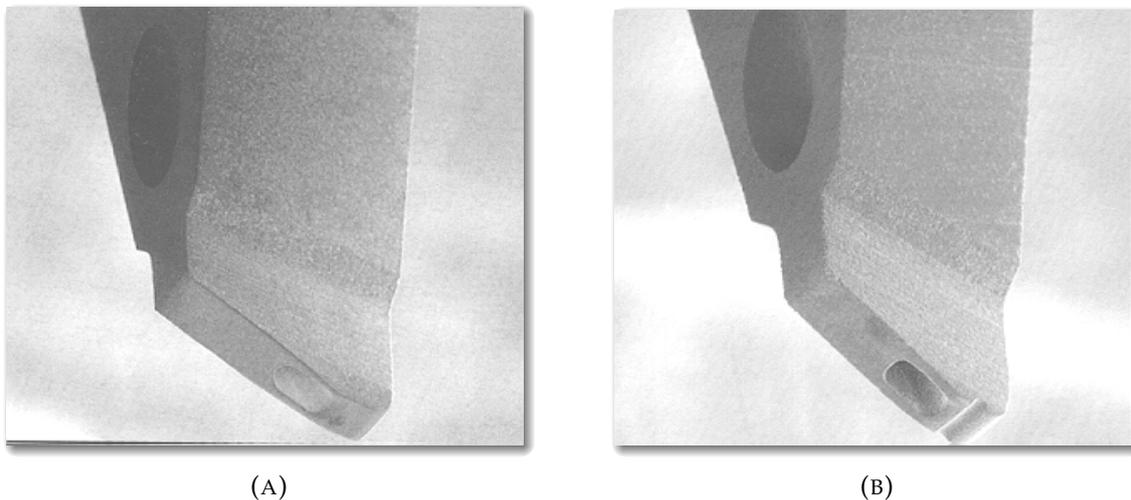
Wedge tools. (A) for Al wires; (B) for Au wires.
